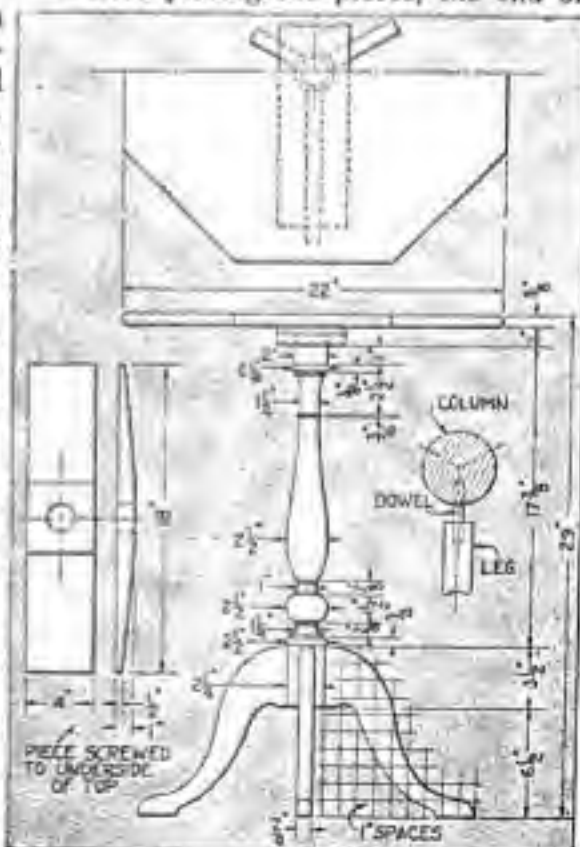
Elevation and partial top view of the table shown in Fig. 29; details of the leg joint and top brace.
